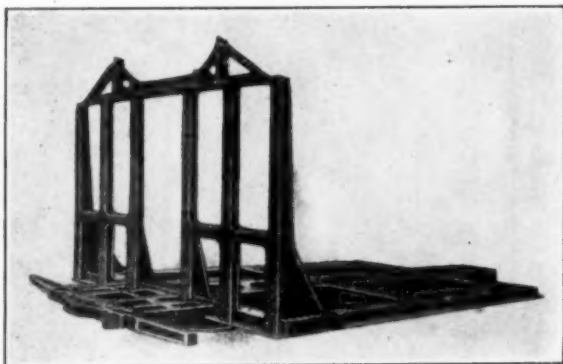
INTEGRAL STEEL CASTING USED IN END FRAME CONSTRUCTION
